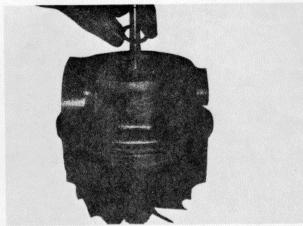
L-30. Installing the Bearing Washer (Compressor End)
